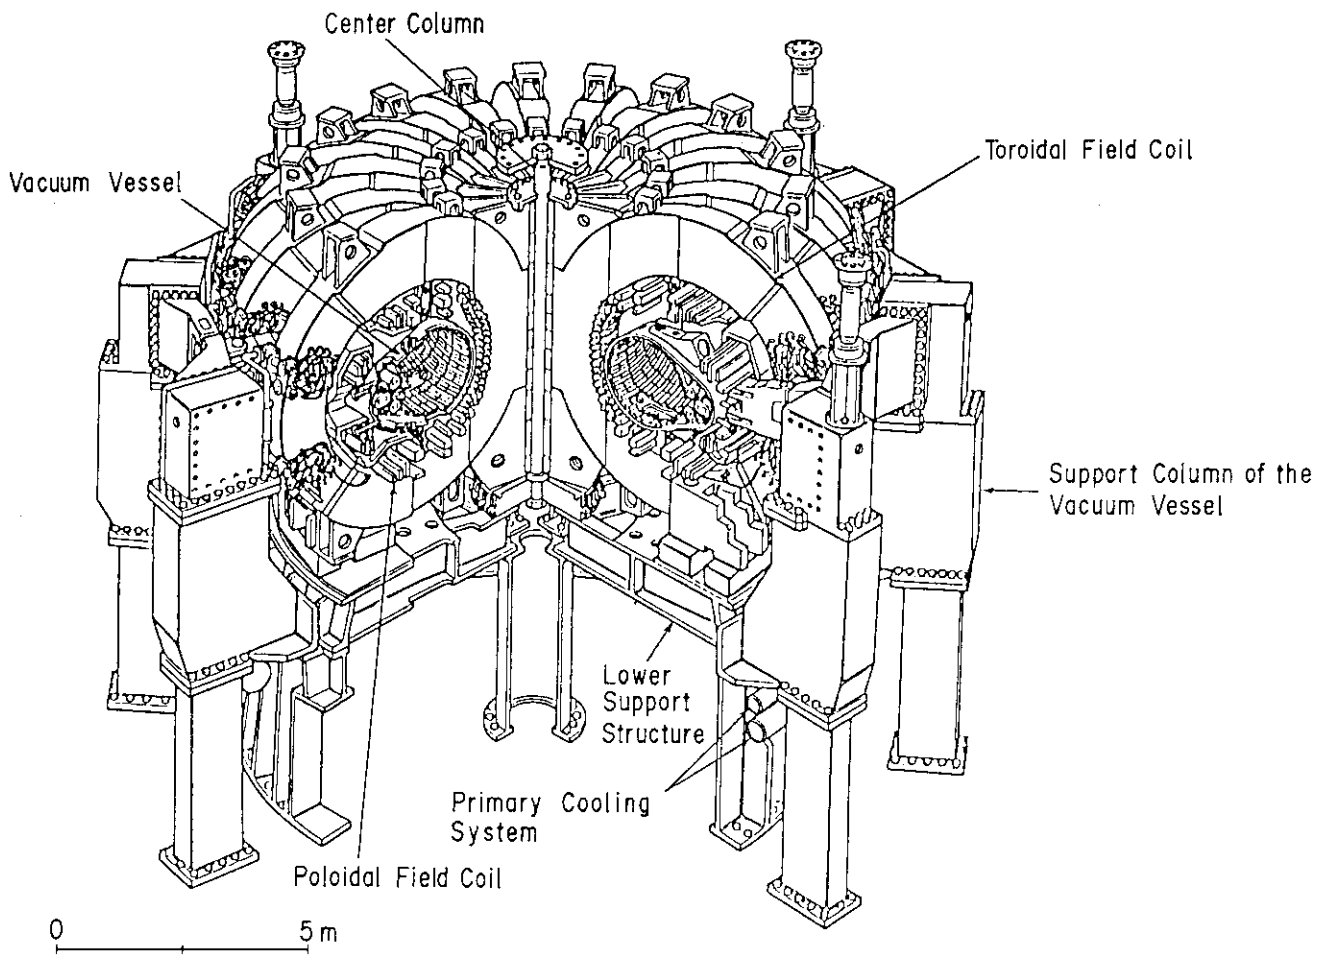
Bird's-eye view of the JT-60 tokamak machine.
